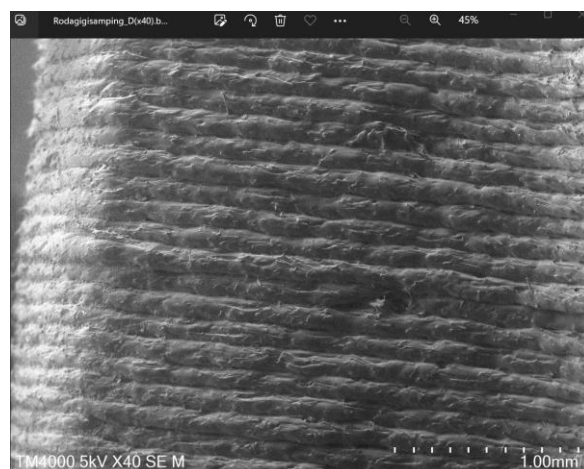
Photo of the tooth surface after the torsion test in dry conditions on Onyx+10 % Carbon Fiber
